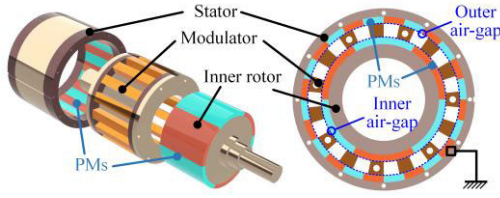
Single-stage CMG (FSMG) in exploded drawing.
